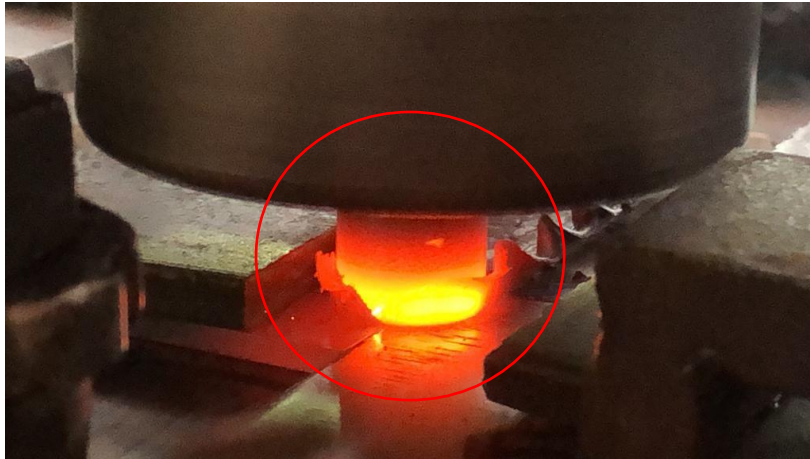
Tool pin damaged grinded due to high temp/pressure/forces
